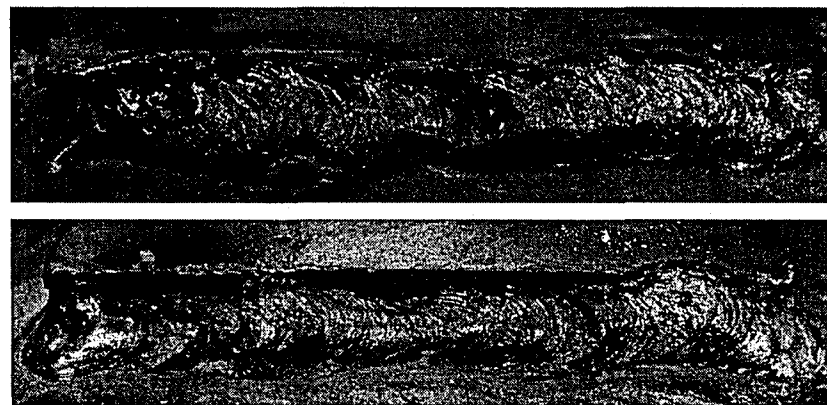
Specimen PC-6—Top Image-Weld 1(Wet), Bottom Image-Weld 2(Wet)
